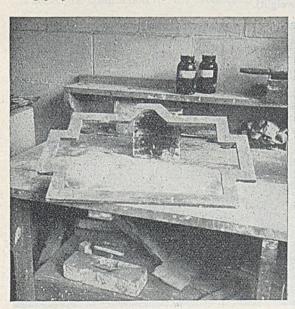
Steel Frame placed between the Two Halfmoulds to form the Shape and Thickness of the Matchplate.
